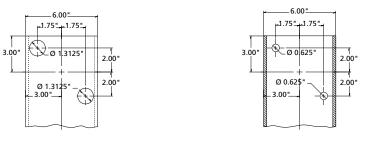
DETAIL POST ASSEMBLY 6 x 4 FRONT ELEVATION
